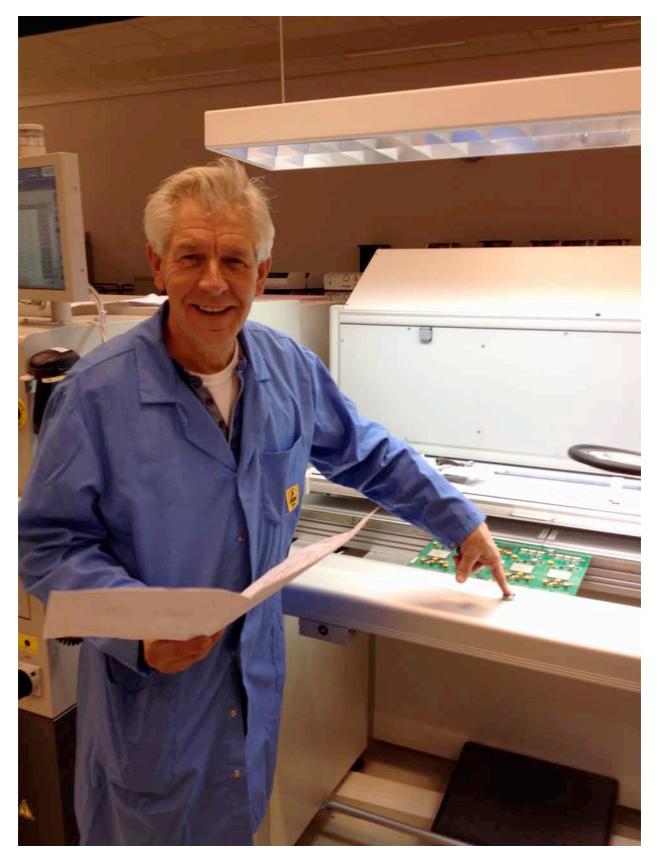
ASTRON hardware engineer Sjouke Zwier is about to start the soldering
